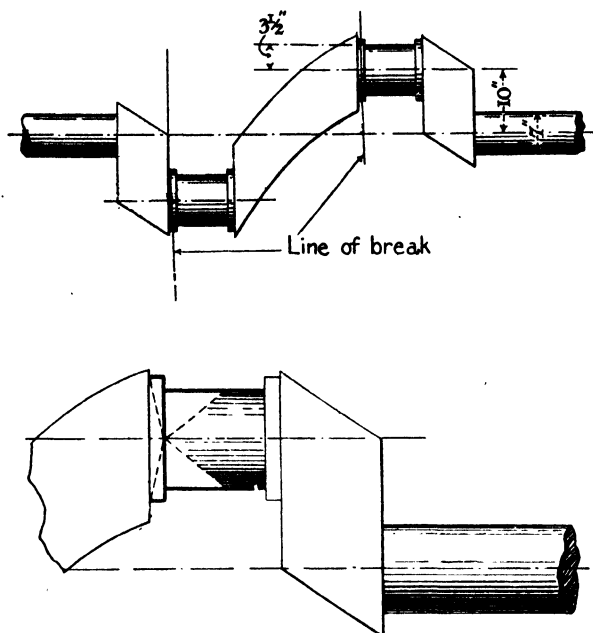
CAST STEEL CRANKSHAFT BROKEN OFF BETWEEN THE WEB AND REPAIRED BY THE ELECTRIC-ARC WELDING PROCESS. Dotted Line represents the Ends prepared for Welding.
